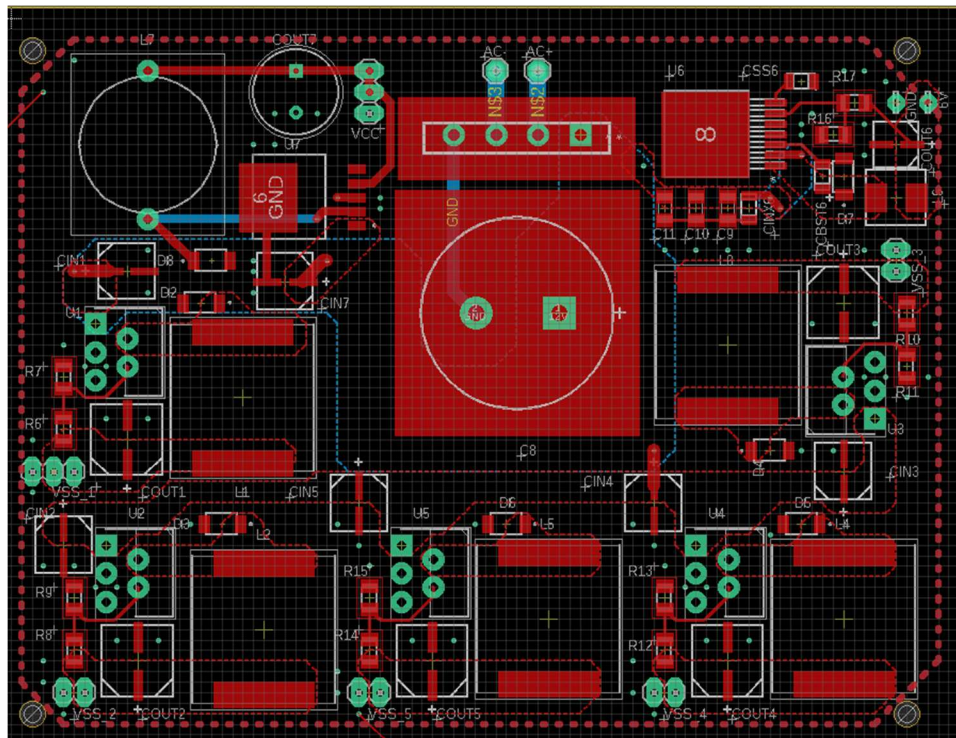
Final Stepper Motor Driver Module PCB
